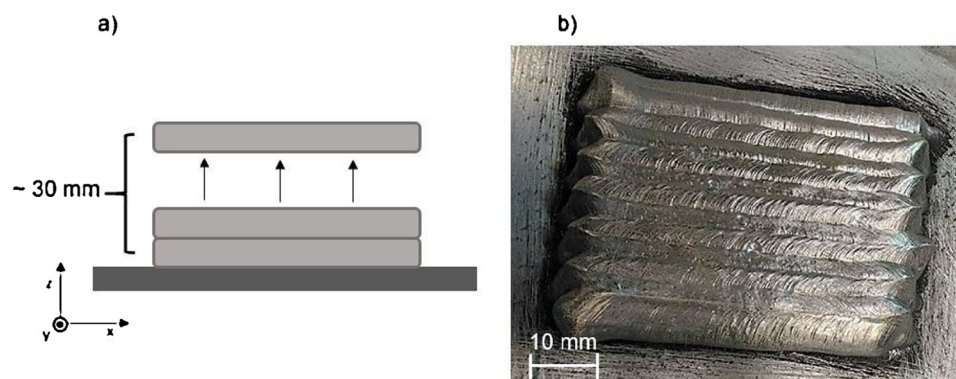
WAAM samples produced for NDT inspection. (a) Scheme of the production method of blocks. (b) Example of aluminium block.
